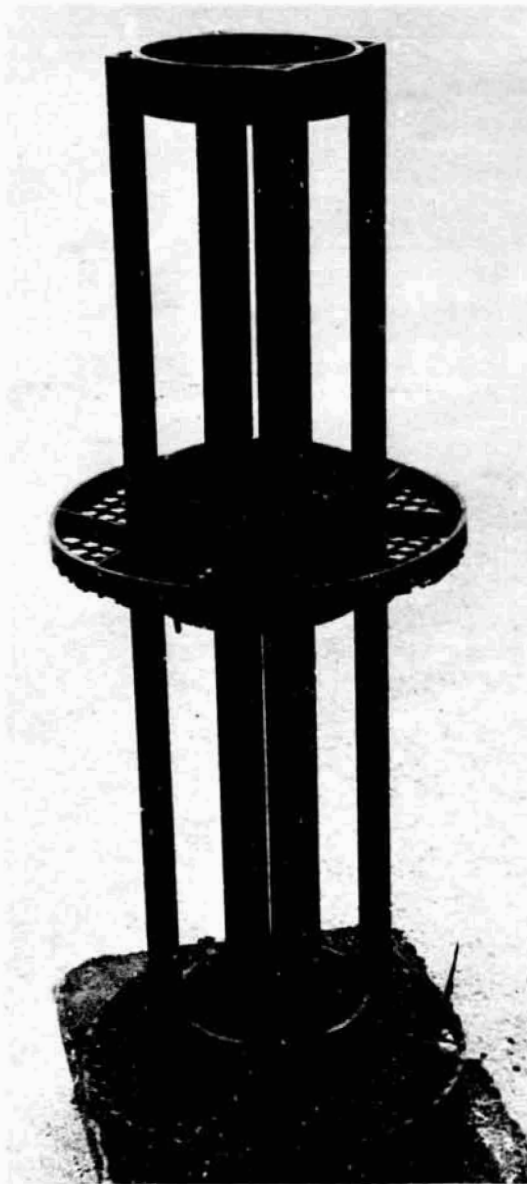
Stacked Assembly of Support Grid Rings Covered with Heavy Wire Mesh and Bed Depth Spacers
